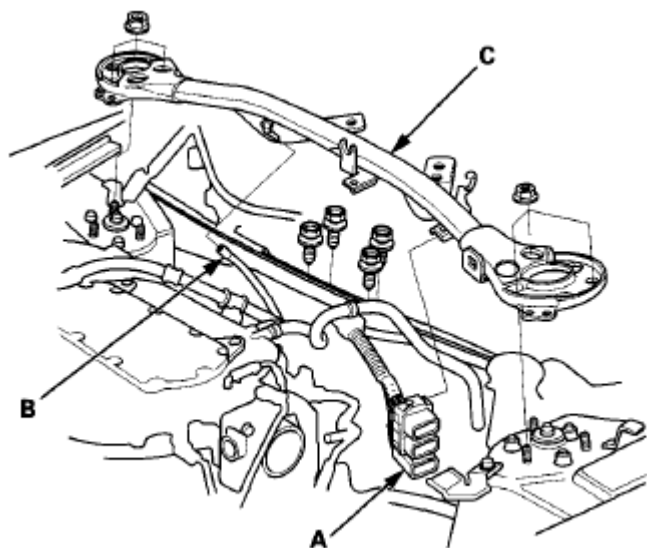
Removing Connector Clamp And Transfer Breather Hose
